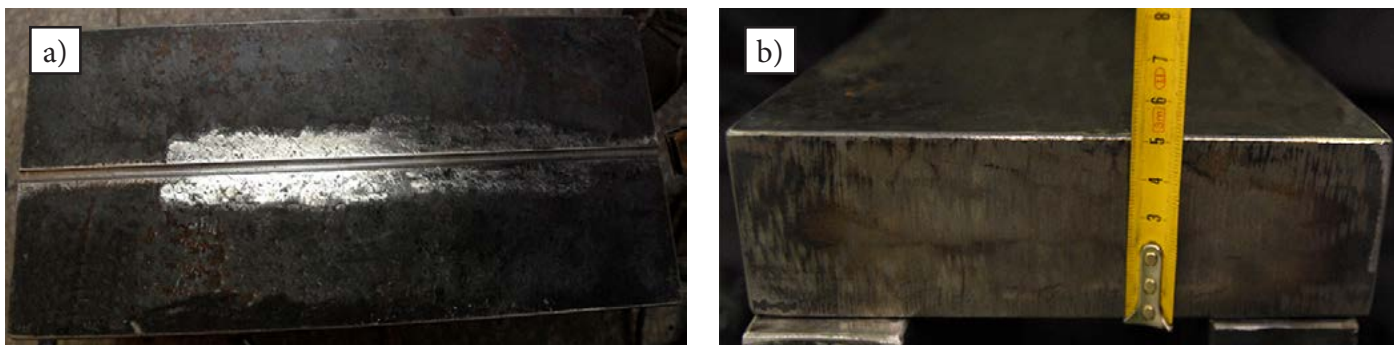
Post-treatment view of the specimen: a) groove b) front
